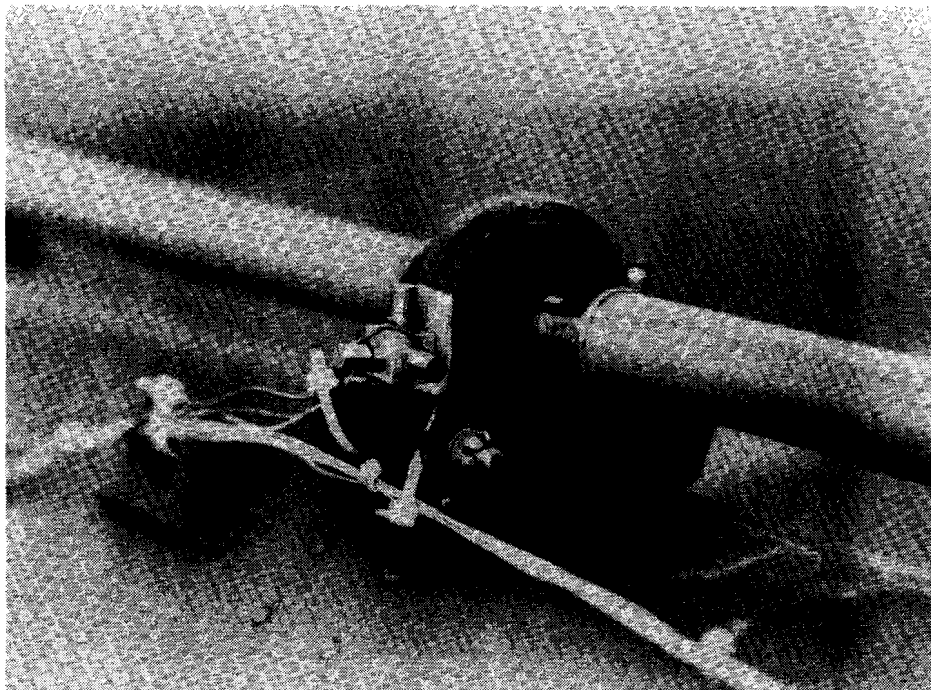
Typical OH-58 Hanger Bearing Assembly with Bonded Triaxial Accelerometers
